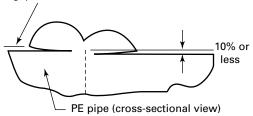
Polyethylene Pipe Butt-Fusion Joint O.D. Bead (Cross-Sectional View)
